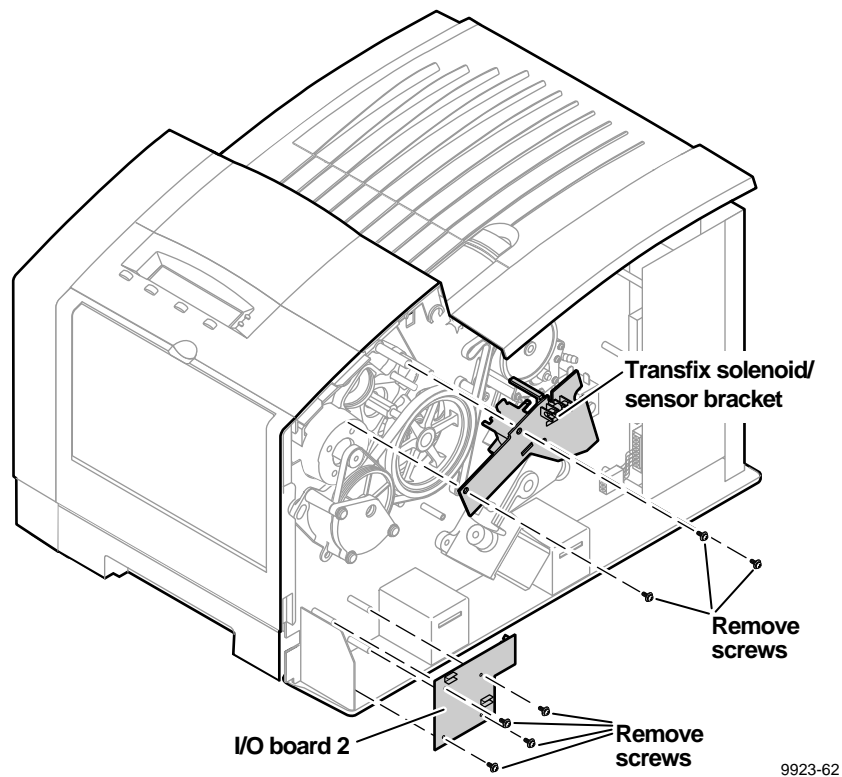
Removing I/O board right and the transfix solenoid/sensor bracket
